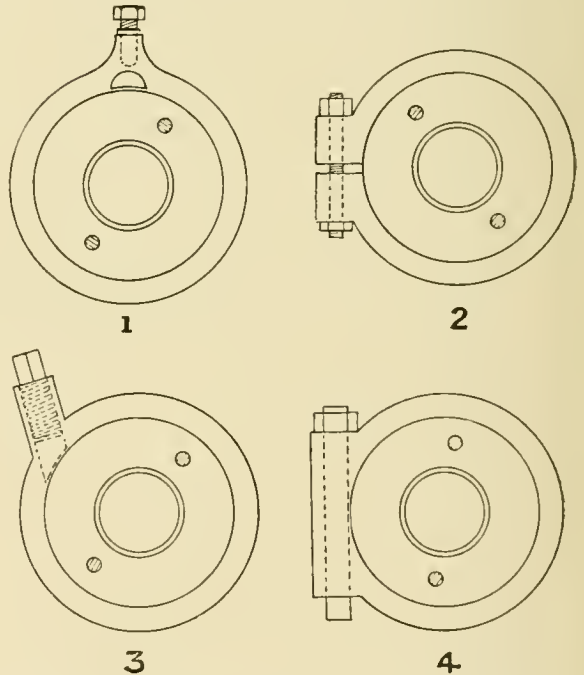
METHODS OF LOCKING THE CRANK-BEARING (CUP-ADJUSTING).
